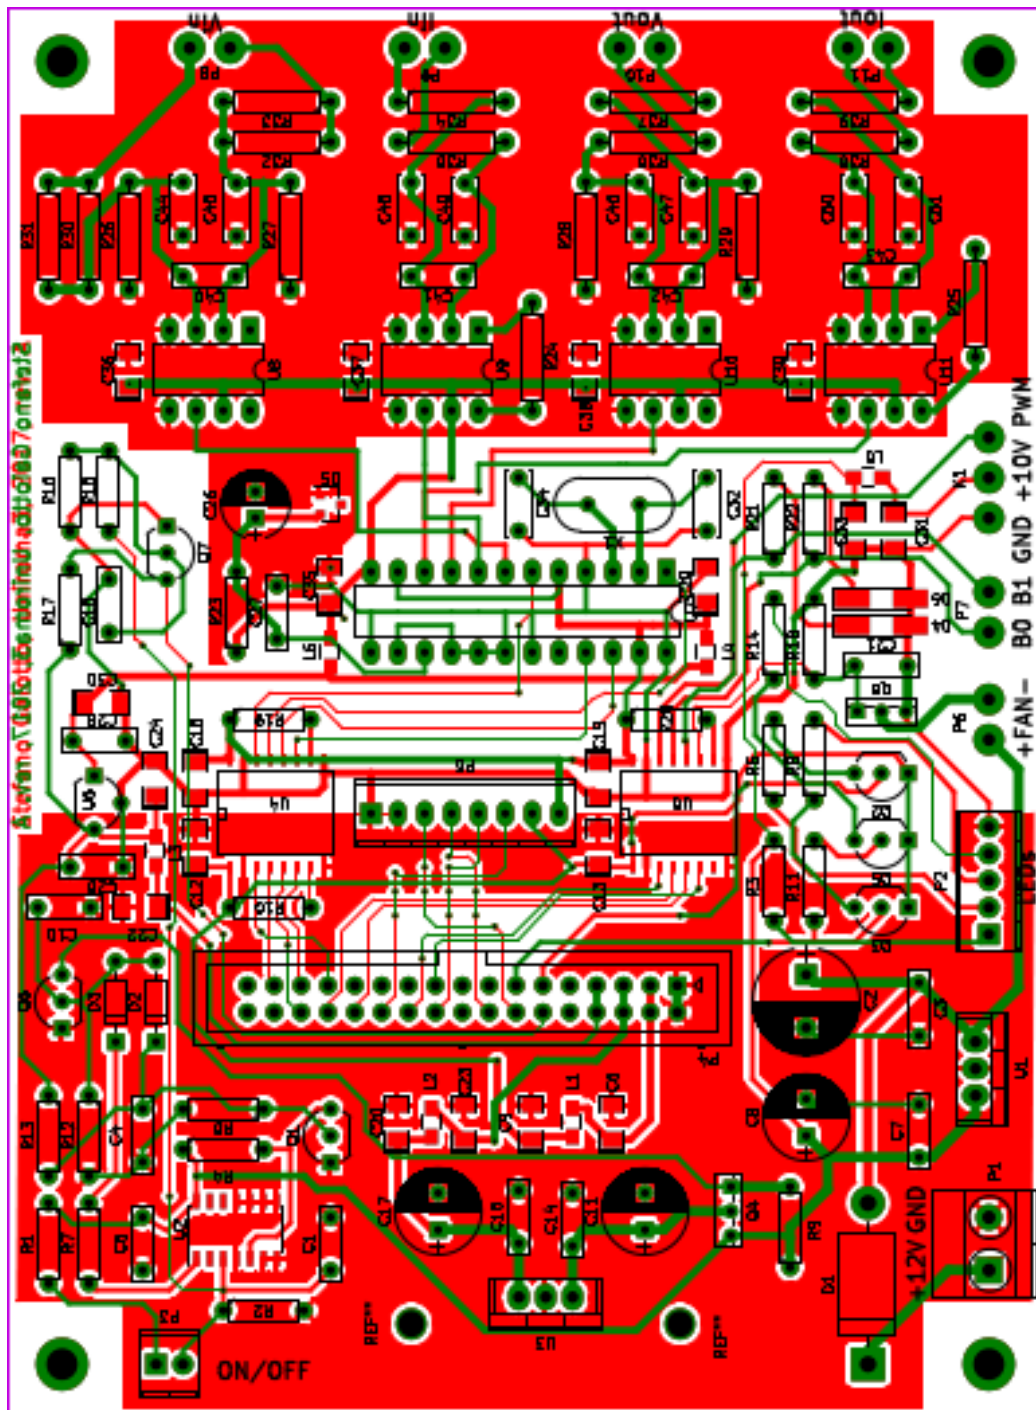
PCB layers of the signal conditioning and measurement unit
